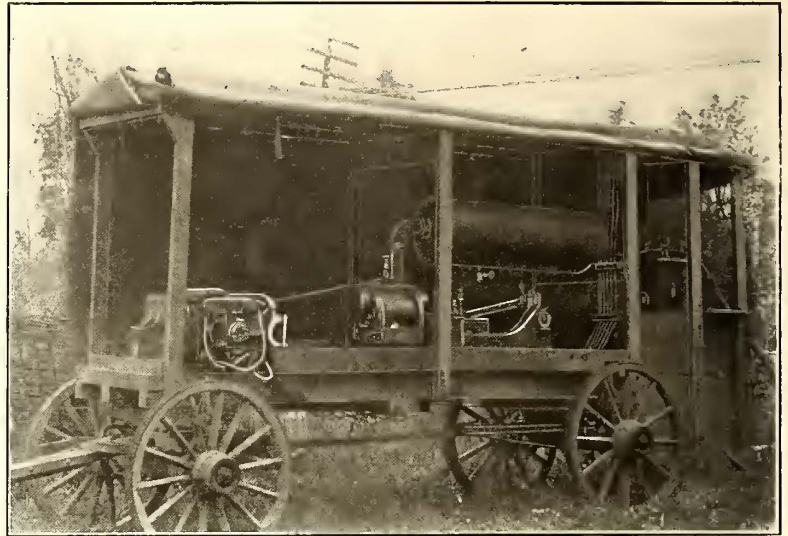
SAND MIXER AND SAND BLAST FOR CAST WELDING
